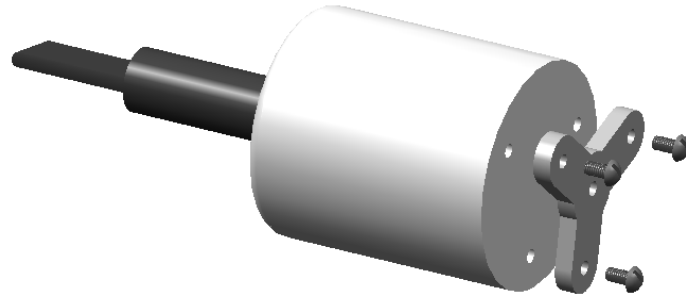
The bolted-in pulsator connection plate attaches via a bolt to the ball joint to the pulsator.
